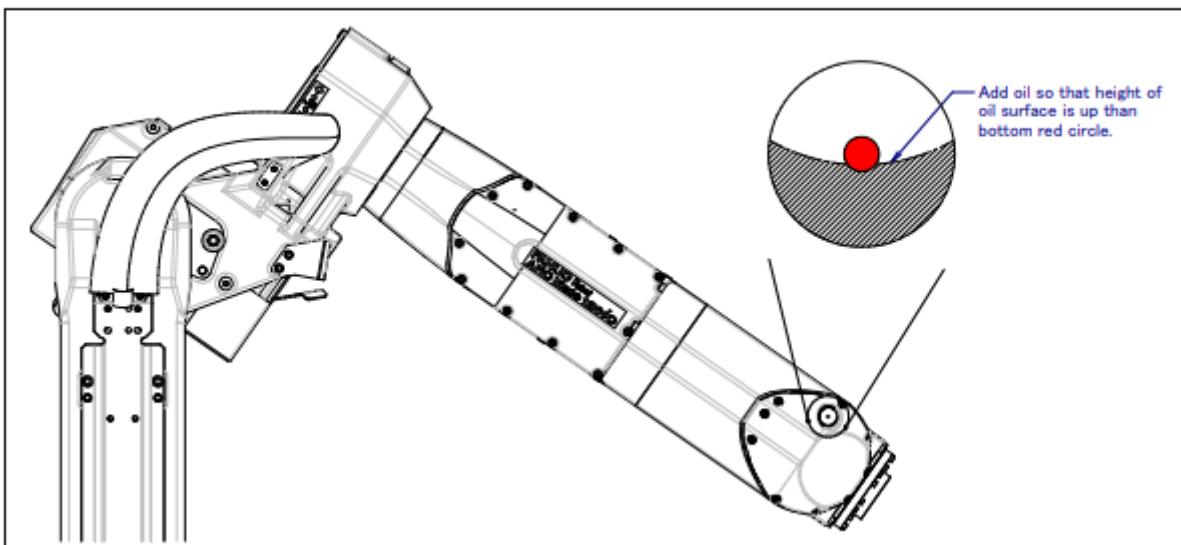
(d) Standard of oil sight glass (supply oil J5/J6-axis gearbox) (ARC Mate 120iC, M-20iA)
